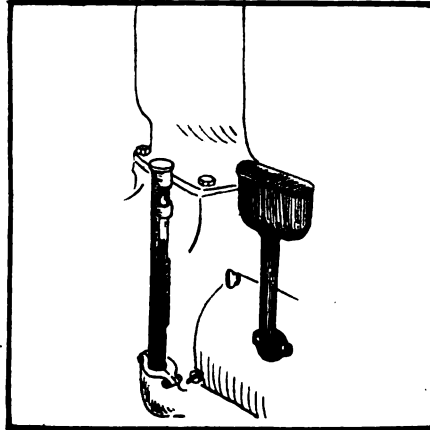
Method of attaching a sight-feed and filler to the base chamber of a motor
